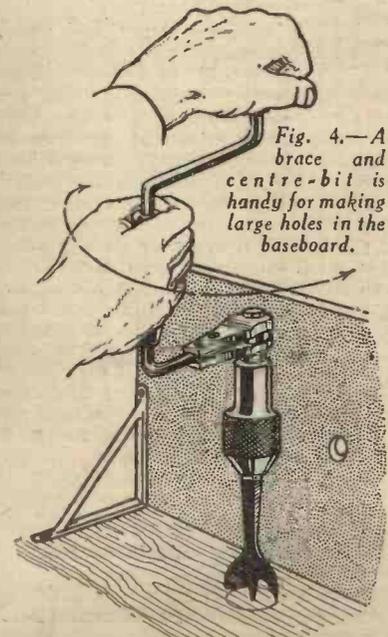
A brace and centre-bit is handy for making large holes in the baseboard.
